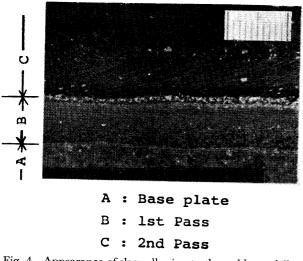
Appearance of slag adhering to the weld metal "as the base metal".
